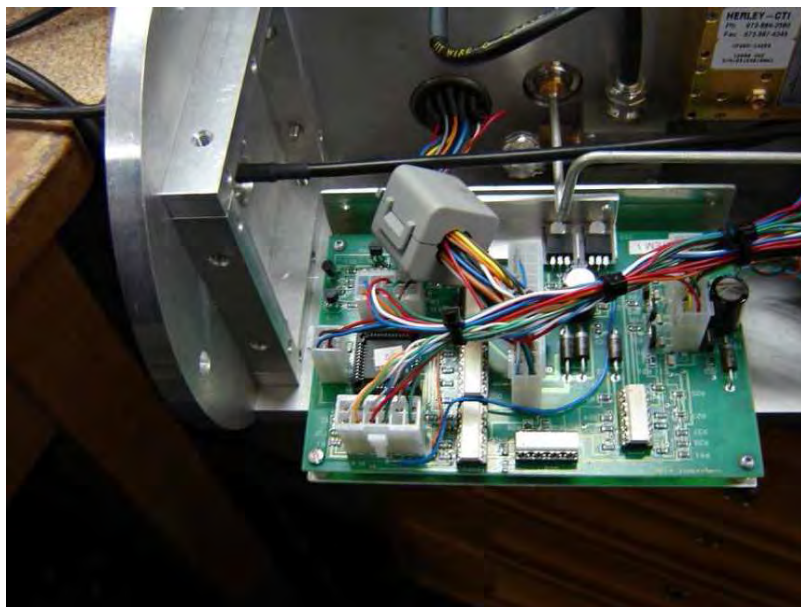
Photograph of RF Logic PCB connected inside Mast-Head Box. To reduce EMI a large ferrite choke is clamped to the power and signal lines (from the Multi-core Control and Power Cable) as they enter the Mast-Head Box via the panel mount connector on the back panel. These lines connect to the centre socket on the RF Logic PCB and the remaining connectors connect power and CPLD decoded control lines to the RF components.
